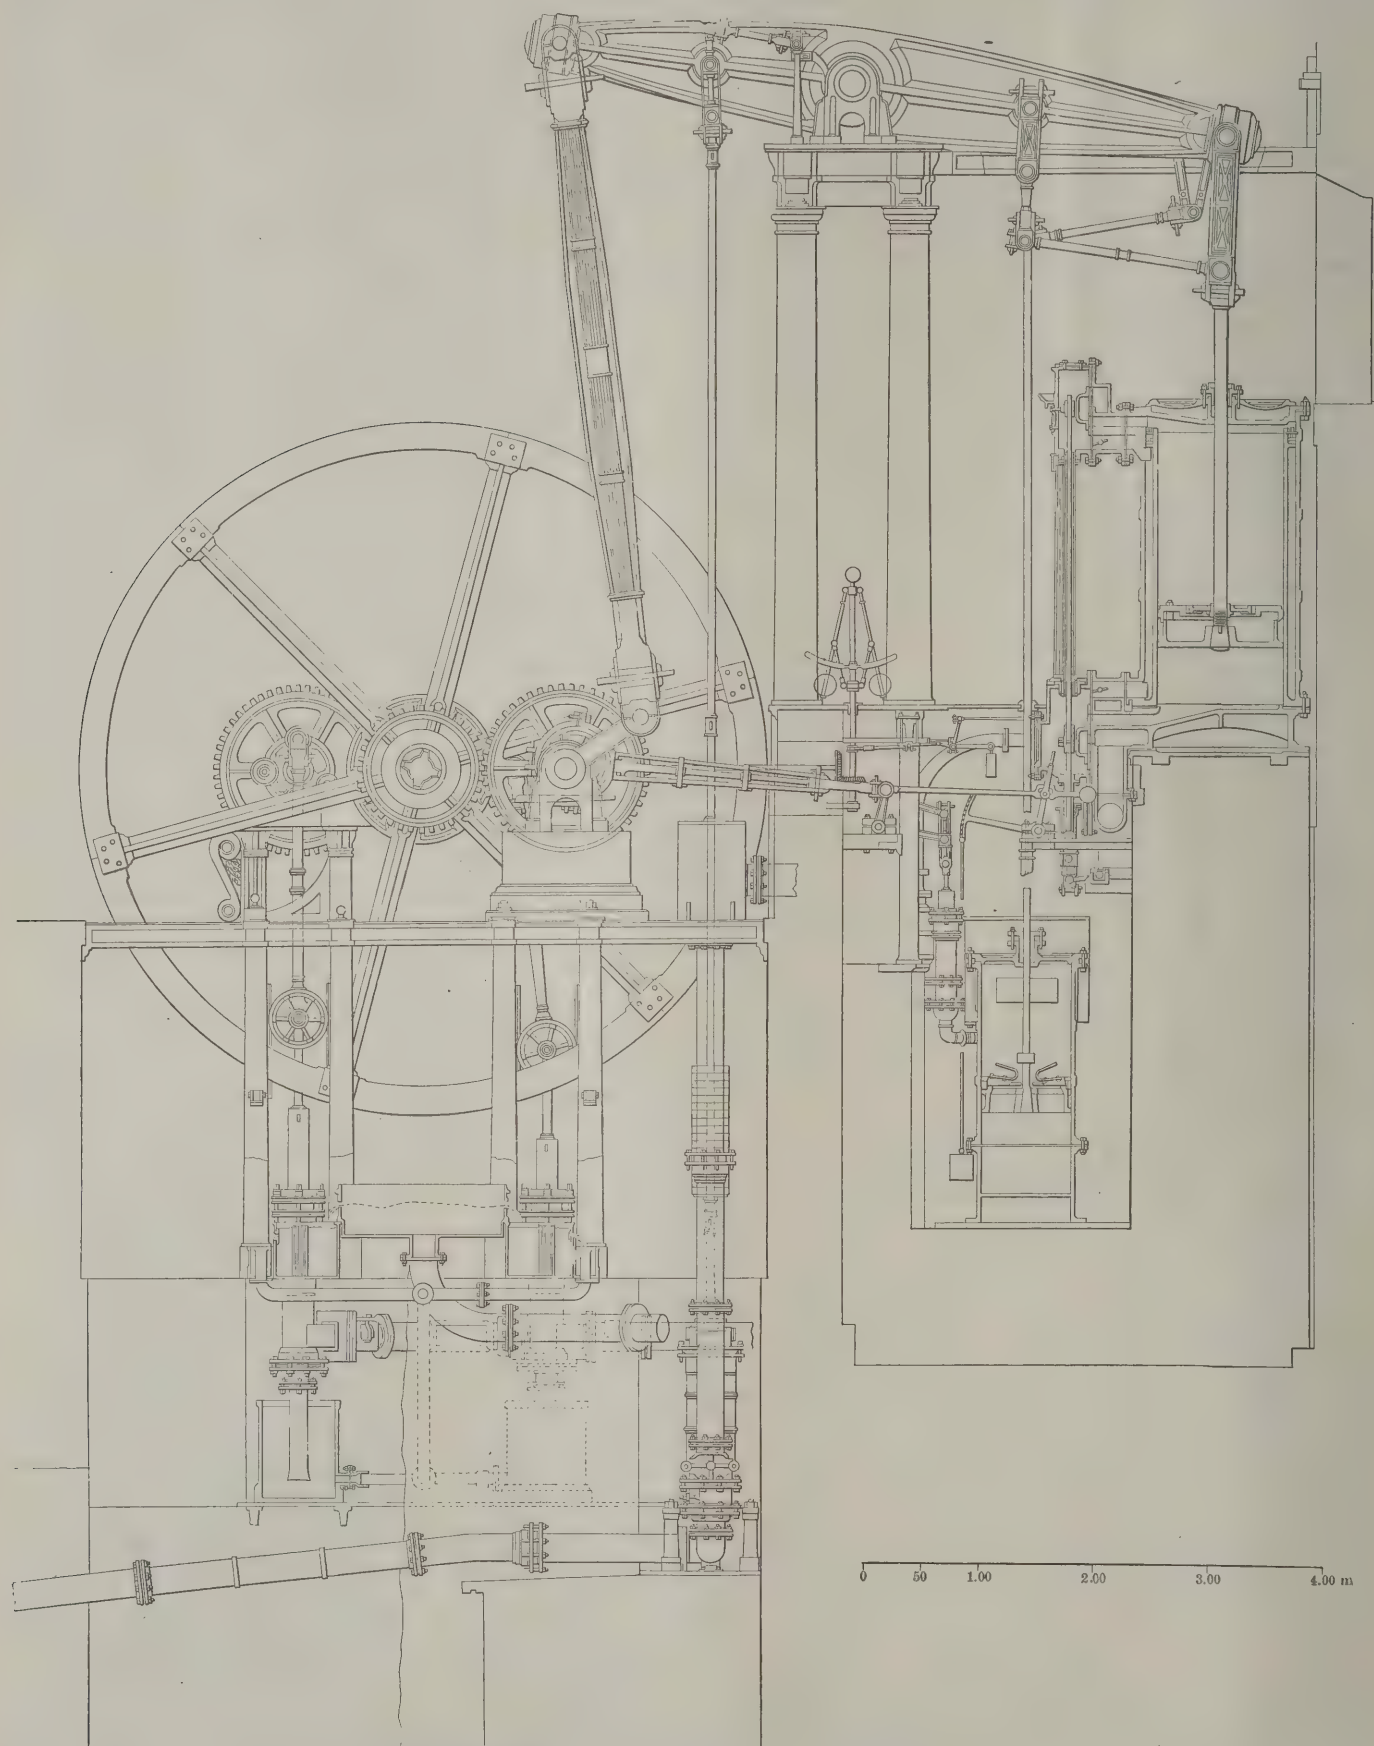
Elevation of the Versailles Water Works Engine at Marley.
